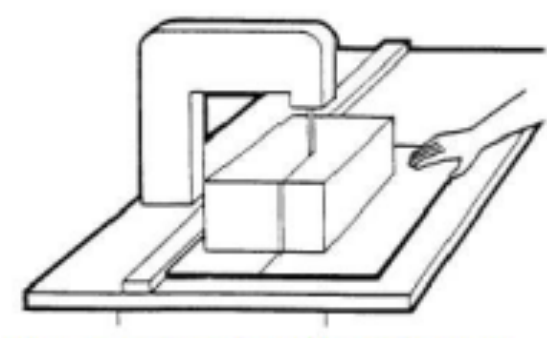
CUTTING FORMED INDURO™ SHEET PART ON BAND SAW
